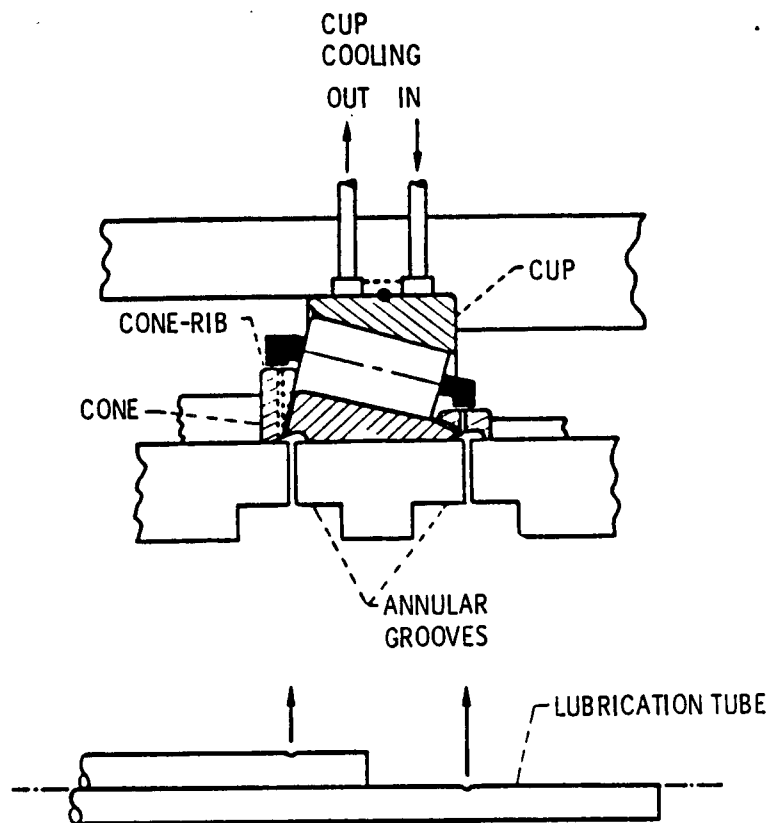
High-speed roller bearing with under-race lubrication and cooling.
